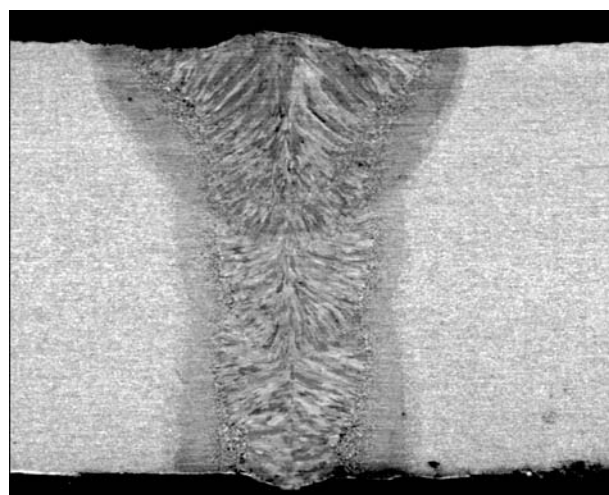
Macrosection of butt joint in steel 10G2FBYu ($\delta = 18.7$ mm) welded by the hybrid method in 4 passes using 1.2 mm dia. wire Sv-08G2S ($P = 2.5$ kW, $v_w = 24$ m/h, $v_t = 400$ m/h, $I = 200$ A, $U = 26$ V)
